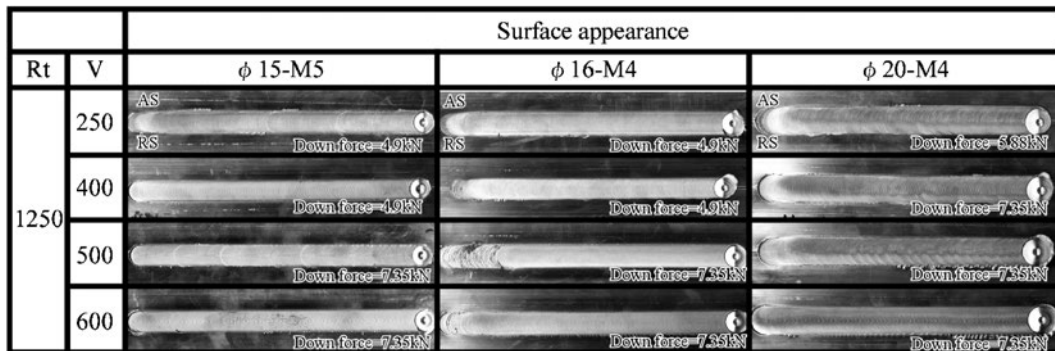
Surface appearances of AZ31 friction stir welds.
